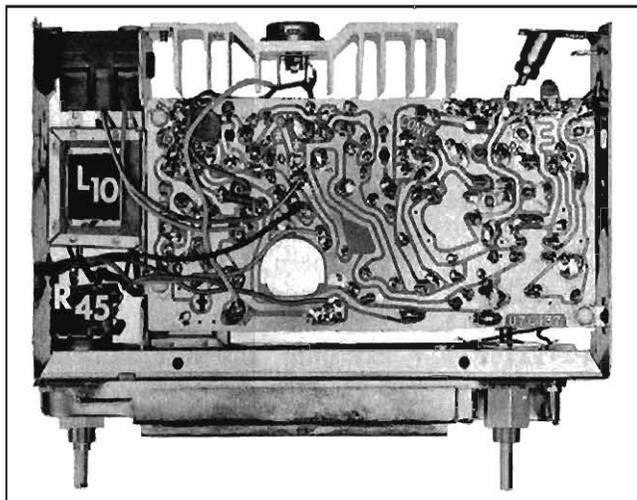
CHEVROLET TRUCK - PARTS LAYOUT - CIRCUIT BOARD VIEW - 985672
